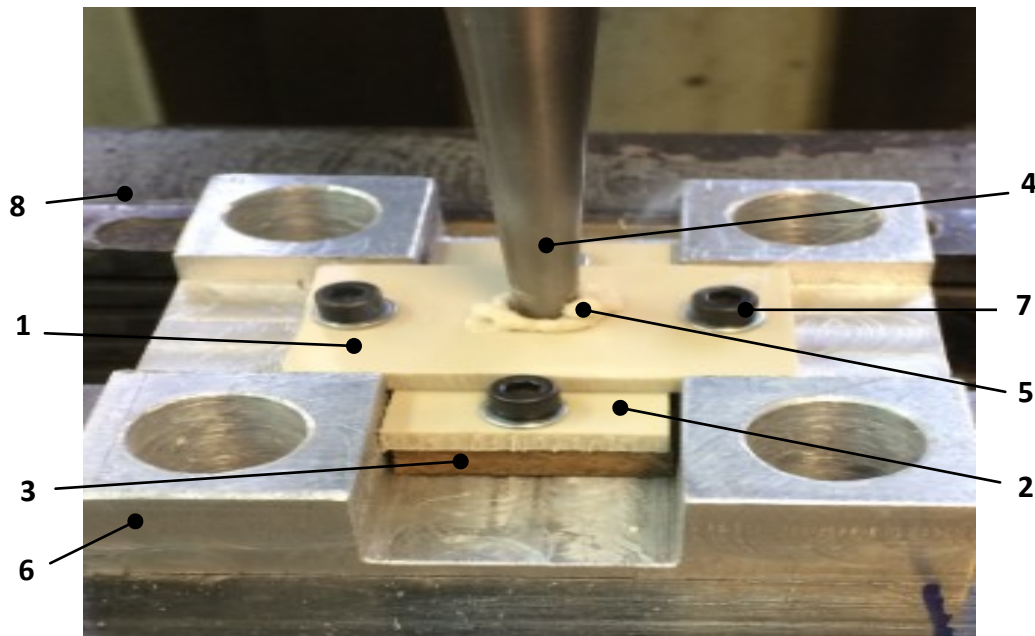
The creation of a sample of a polypropylene welded joint on a milling machine:
